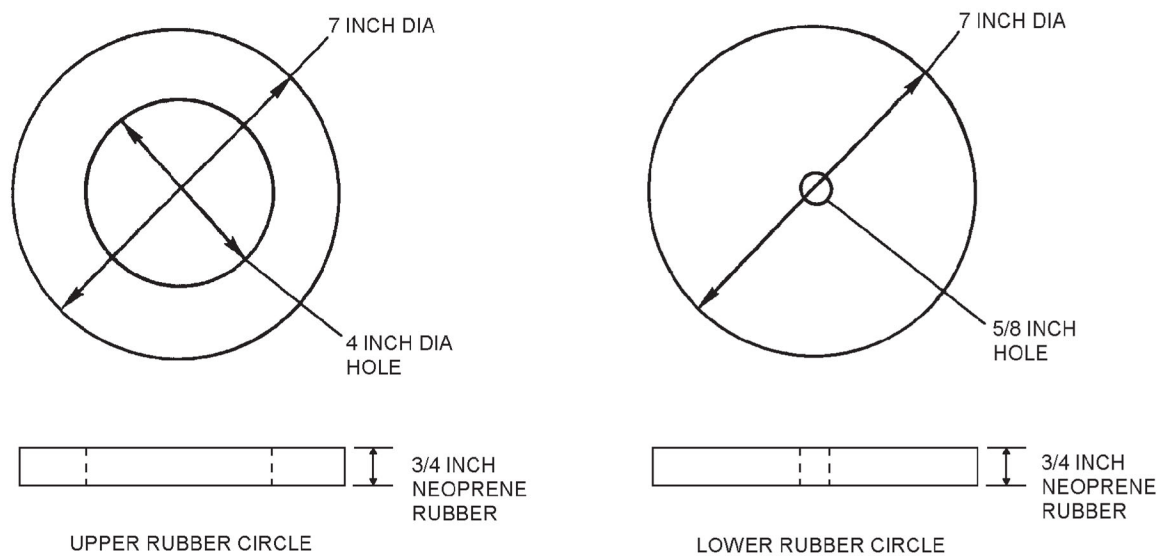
Leak Test Fixture (Sheet 2 of 2)
